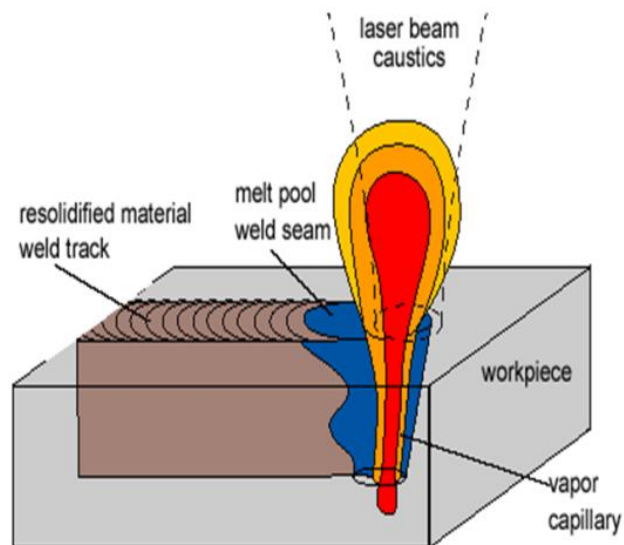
A schematic example of a key-hole mode in laser welding
